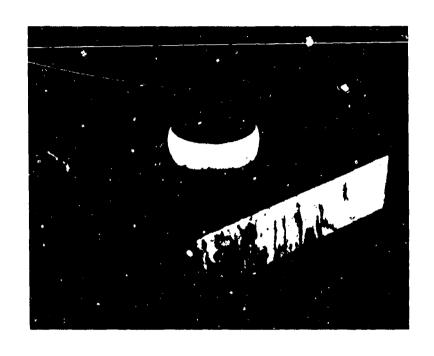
Shear Cracks in Driven Head of 3/8-IN. Dia. 7050-T7X Rivet 2nd Step of Aging: 8 Hrs. at 345°F
